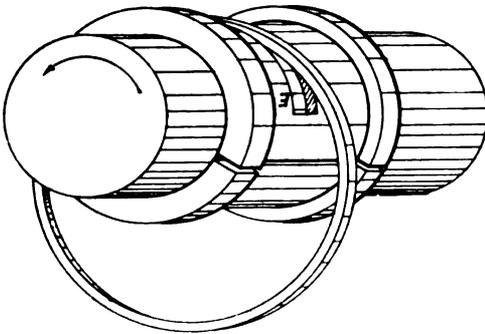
Shaft in Bearing, with Oiling Ring.
